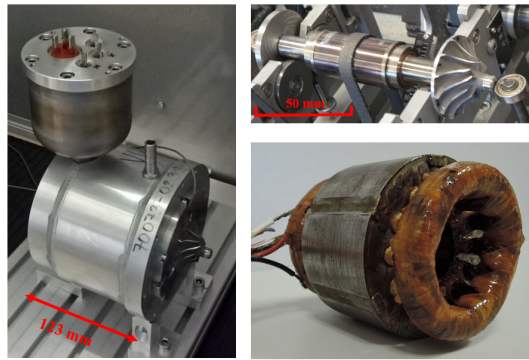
Assembled compressor, rotor during balancing and the wound stator.
